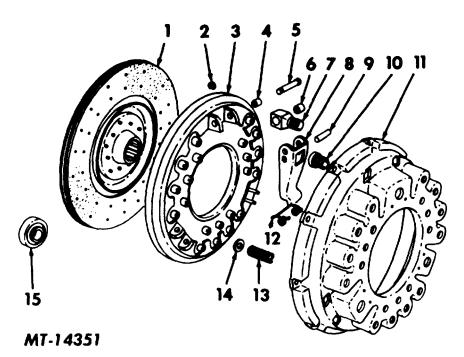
Exploded View of 14" Single Plate Clutch Assembly
